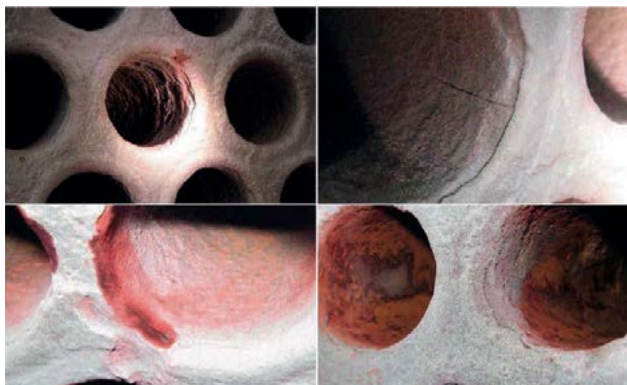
Waste heat boiler tube-to-tubesheet weld failure.
